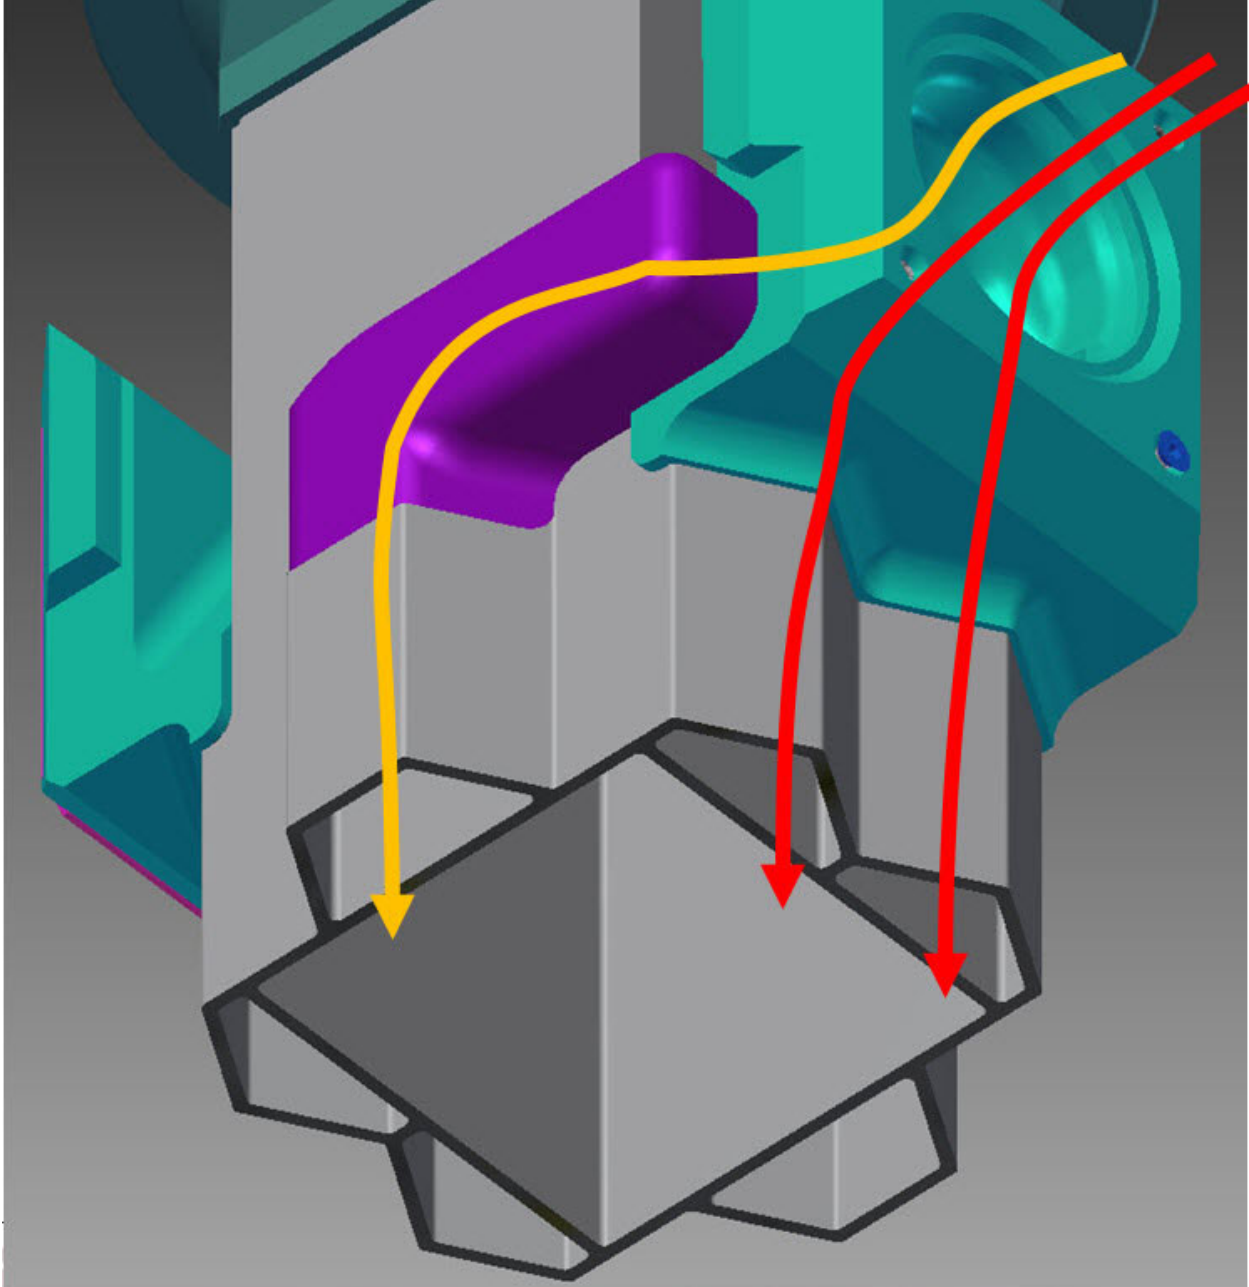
Target manifold illustrates the coolant flow paths. Three channels carry coolant down to the target pack, and the other three channels carry coolant up from the target plates. Coolant in the two five-sided end channels flows through the top half of the target plates (red lines). Coolant in trapezoidal side channel flows through lower half of target plates (yellow line).
